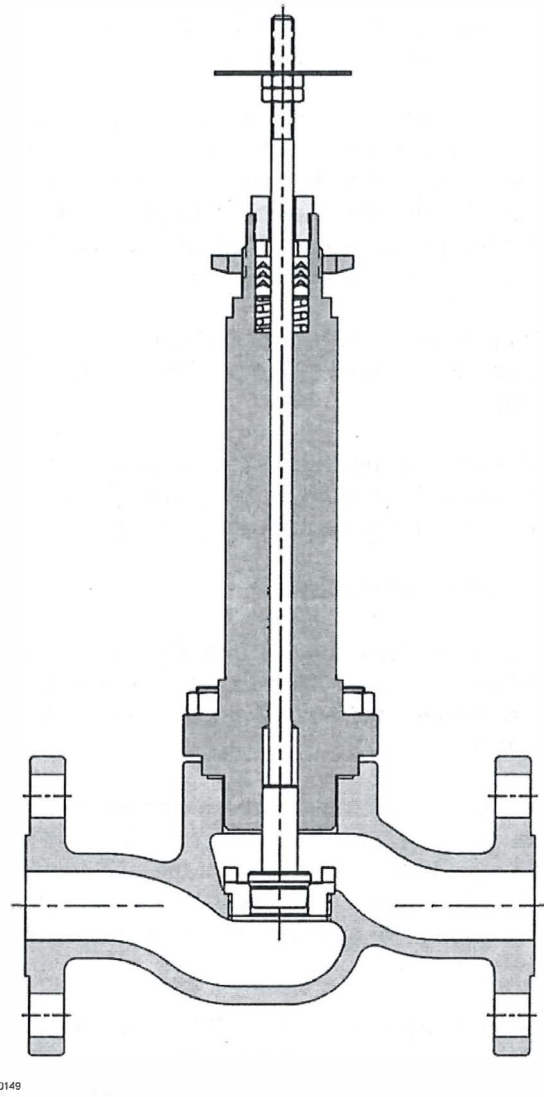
24000SVF Valve Body Assembly Shown with Single Extension
